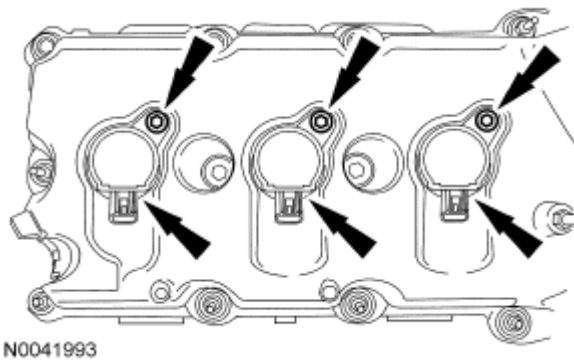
Locating RH Coil-On-Plug Assemblies And Bolts
